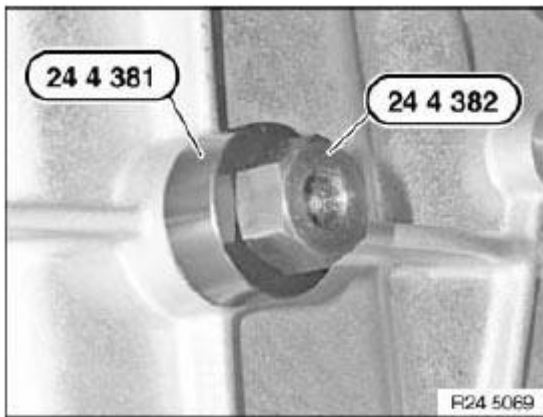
Identifying Special Tools (24 4 381 And 24 4 382)
